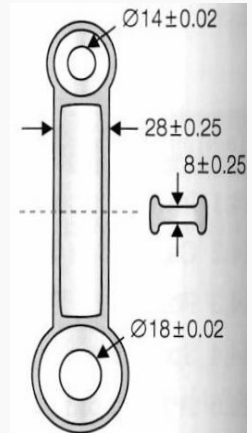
Example of dimensions of a small connecting rod in an internal combustion engine.
